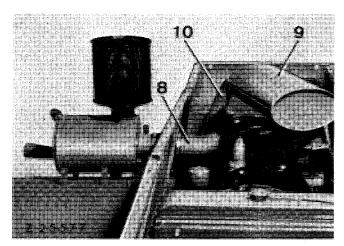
Preparing to Remove Engine (985 Combine Shown)
